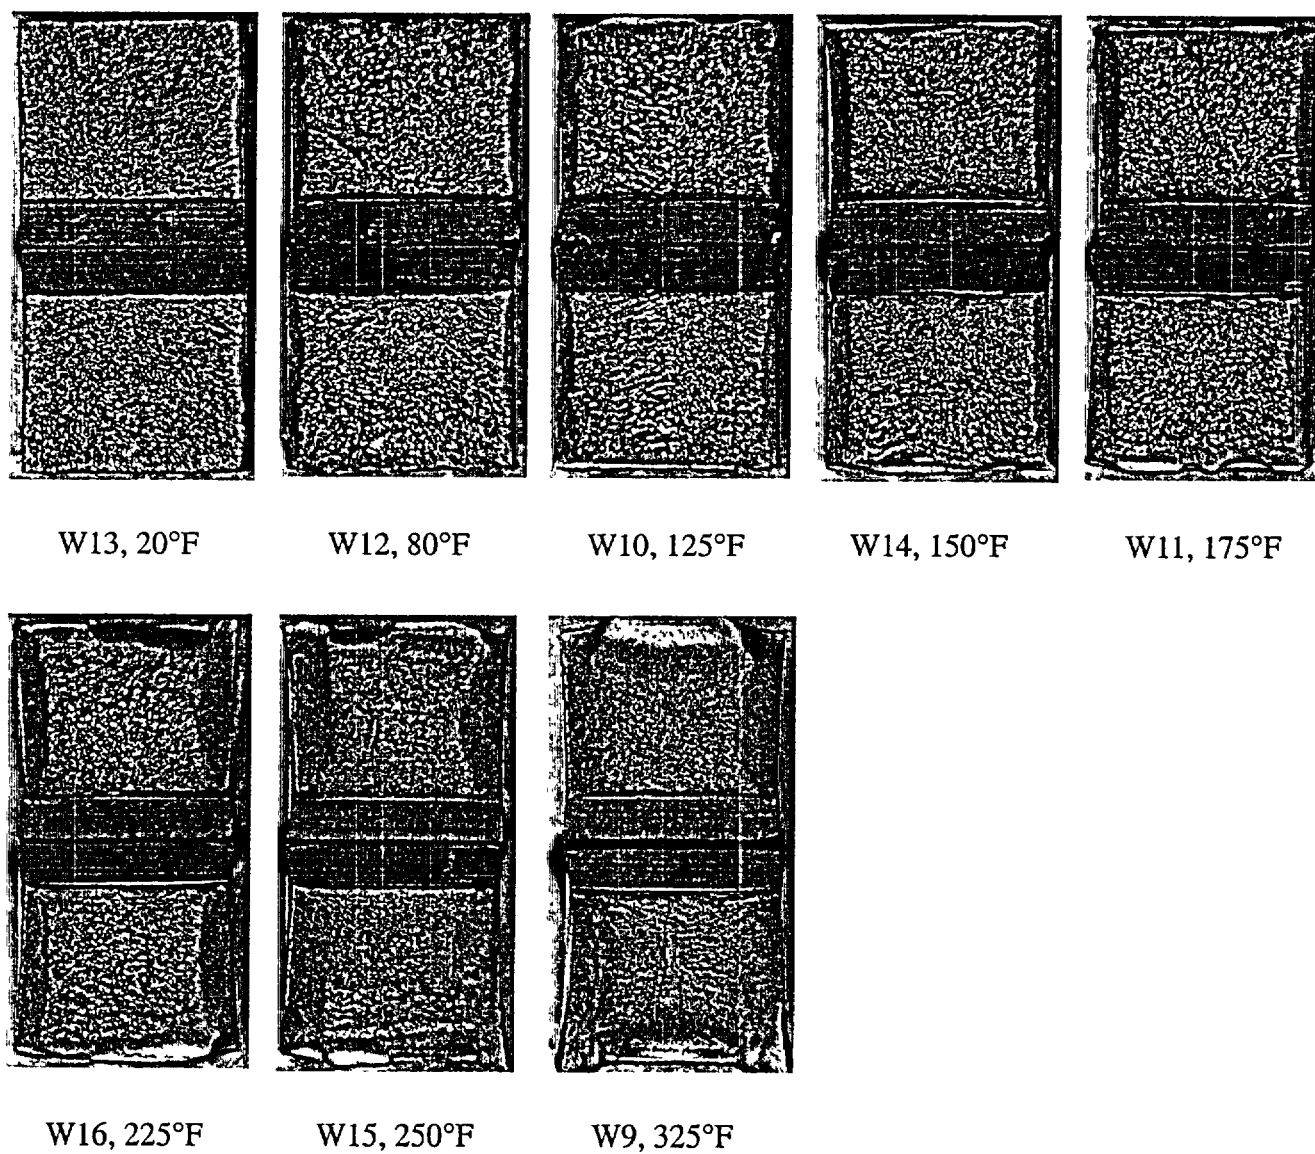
Charpy Impact Specimen Fracture Surfaces for Turkey Point Unit 3 Reactor Vessel Weld Metal
